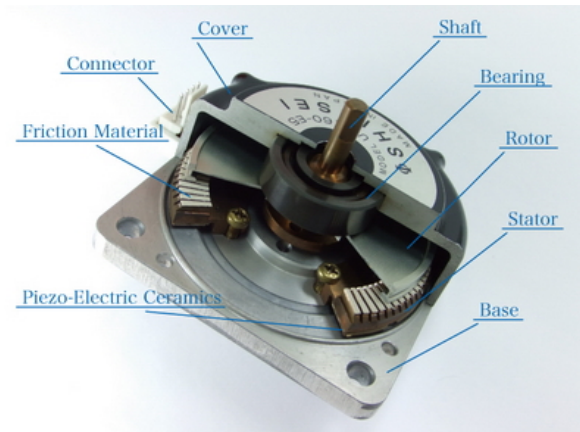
Cutaway View of a Shinsei Ultrasonic Motor
